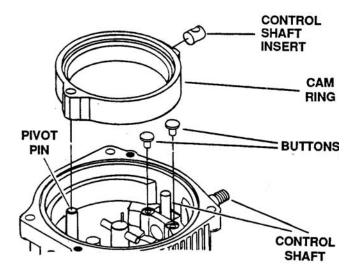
Removal of Cam Ring and Control Shaft Insert
